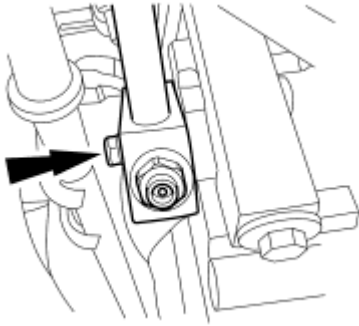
Locating A/C Compressor Electrical Connector
